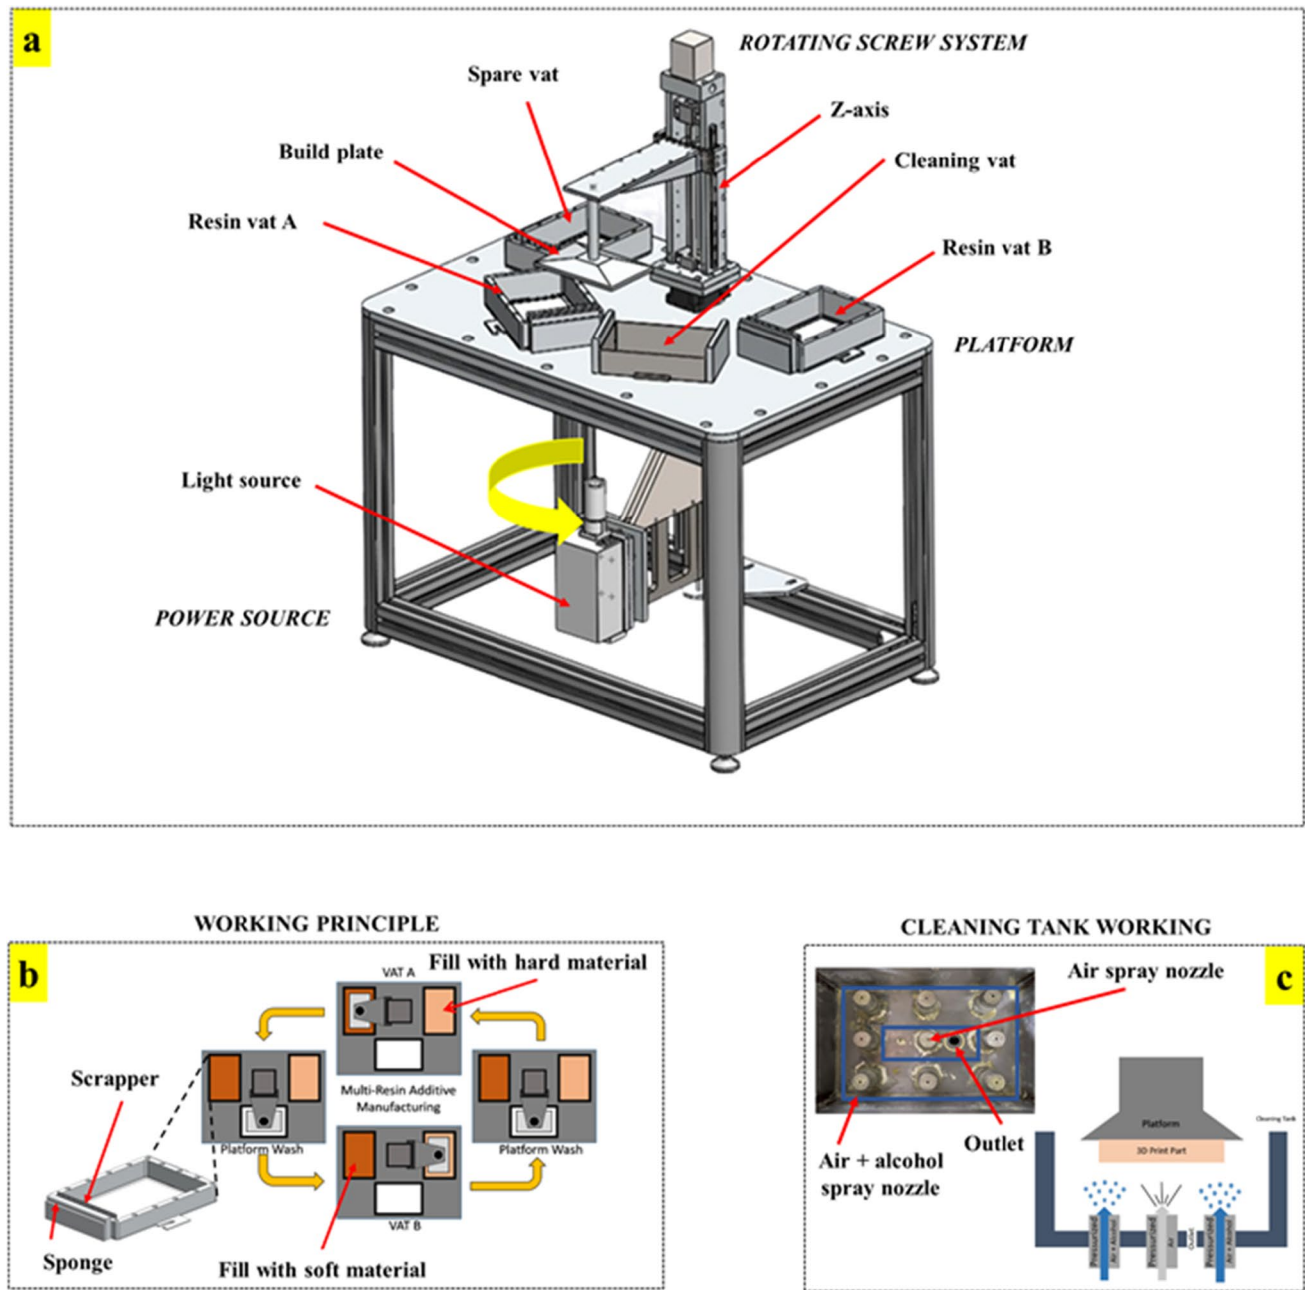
shows a schematic diagram of the high-speed multi-material VP 3D printer. The 3D printer consists of a platform, a rotating screw system, and a power source. As shown in Fig. 2a, the platform consists of multiple resin vats and a cleaning vat. The rotating system holds the build plate that can be raised and lowered along the Z-axis using a rotating screw mechanism. The light source is also attached to this rotating screw system to align the build plate and the rotating screw along the same vertical axis.
